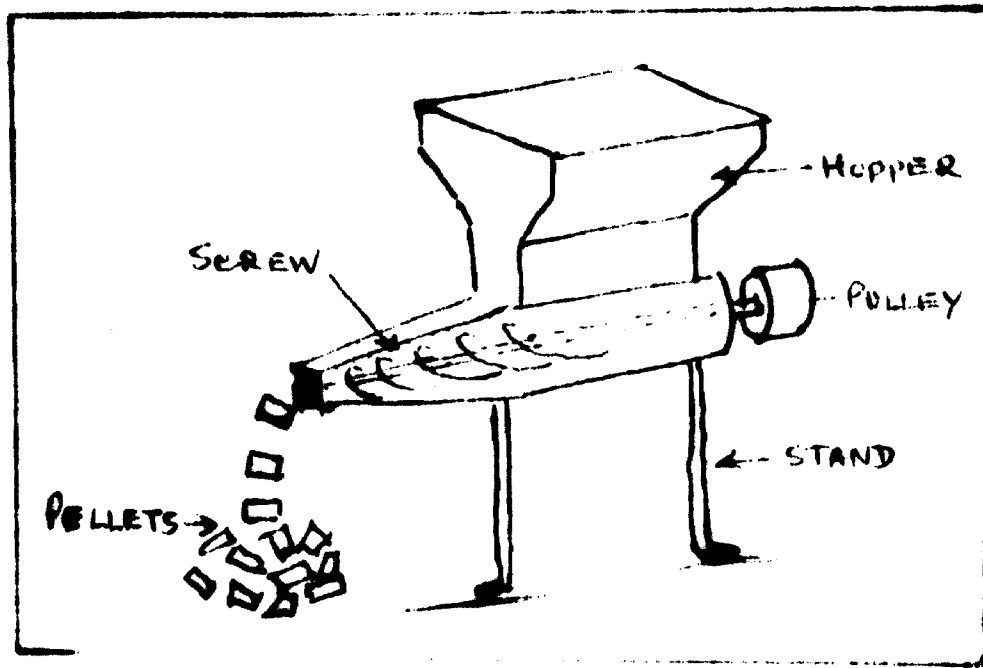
CHARCOAL DUST PELLET MAKING MACHINE
